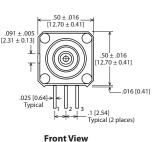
SHA21: Concentric Shafts, Solder Hooks, 2 Potentiometer(s) or RS + MP, 1/4" Bushing
